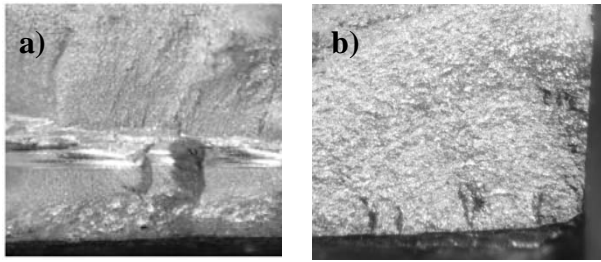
Fatigue crack initiation modes identified in welded specimens.
